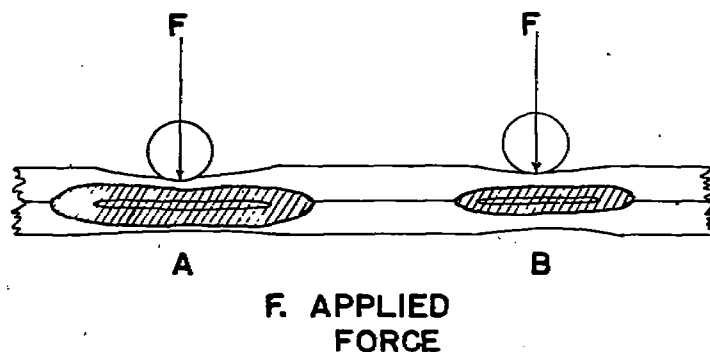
ONE POINT ONE SIDE PENETRATOR TEST OF SPOT WELD NUGGET PENETRATION. GREATER INDENTATIONS RESULT OVER LARGE NUGGETS (A) THEN OVER SMALL NUGGETS (B).
